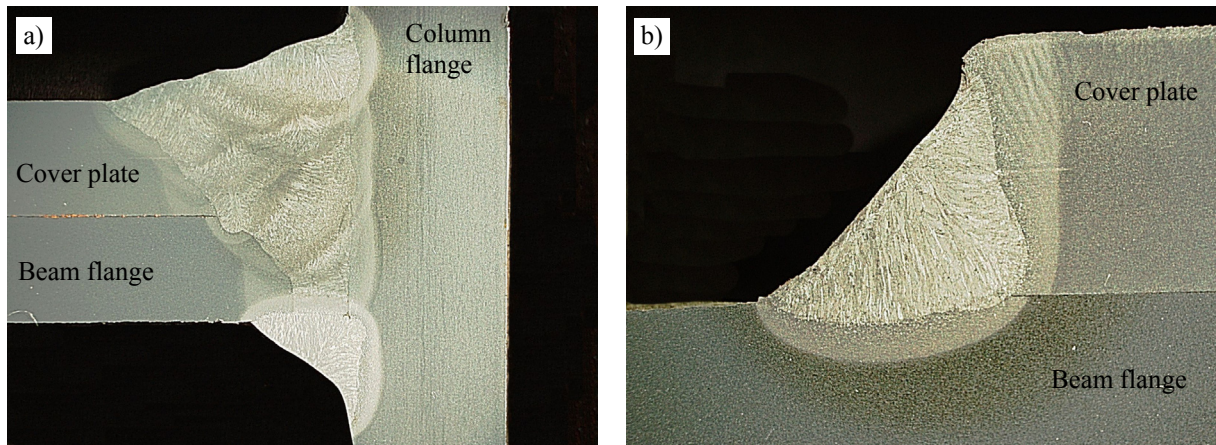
Cross-section of welded connection details from specimen CP1.4: a) Complete joint penetration single-bevel but weld used to connect the beam flange and the cover plate to the column flange, b) transverse fillet weld at the end of the cover-plate
